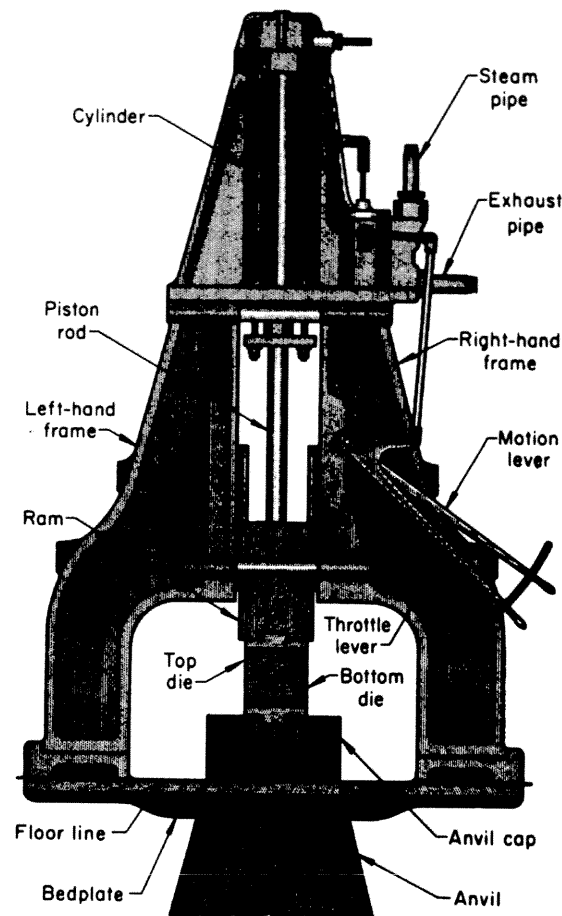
Double-Frame Power Hammer used for Open-Die Forging
